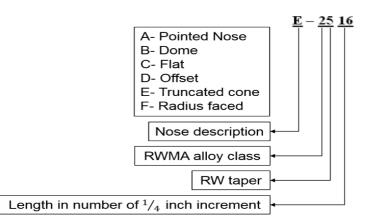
Spot welding electrode's tips description [3].
